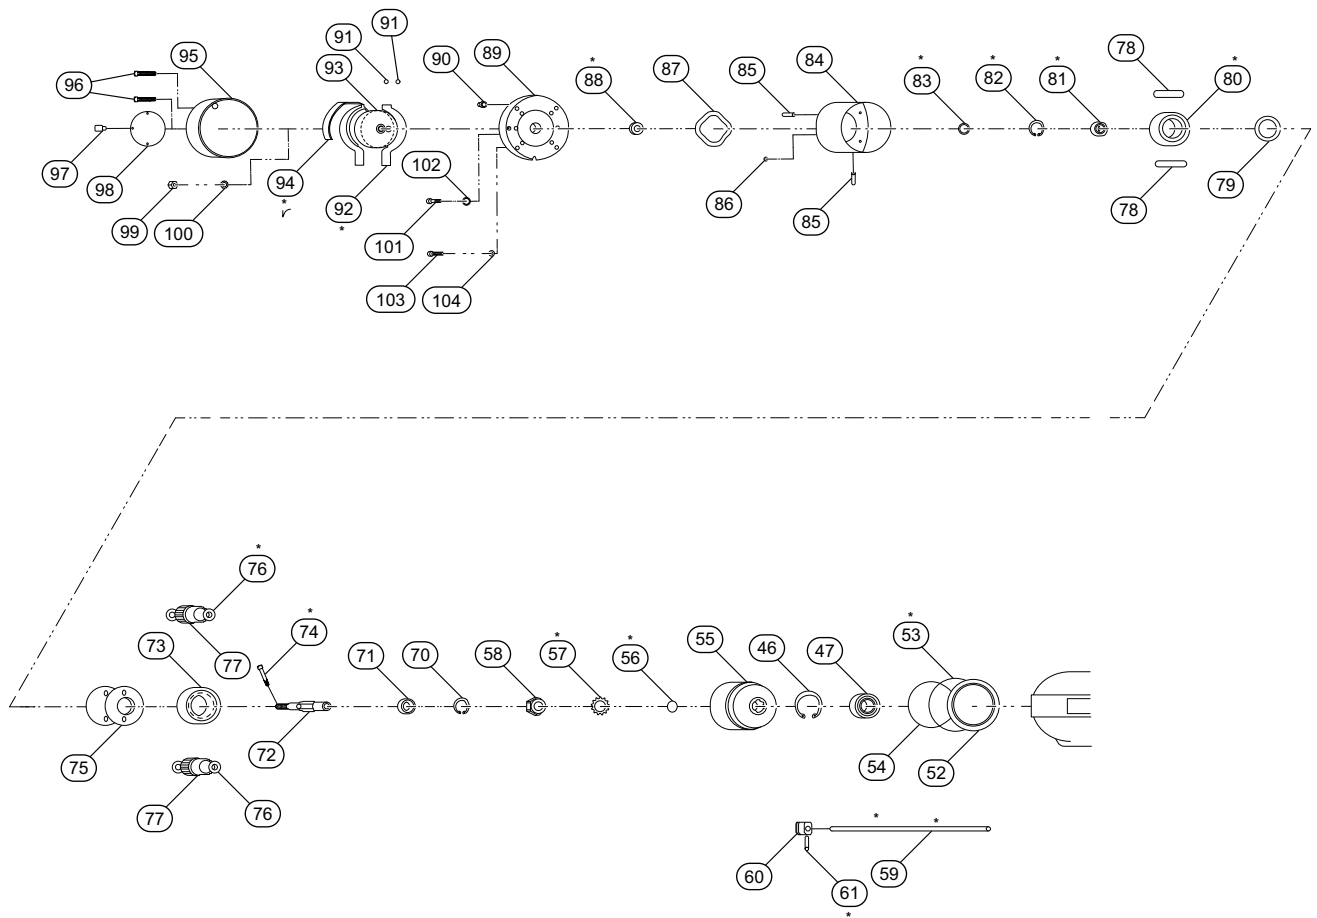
Pull Chain Control Assembly Drawing (MHP4736)
